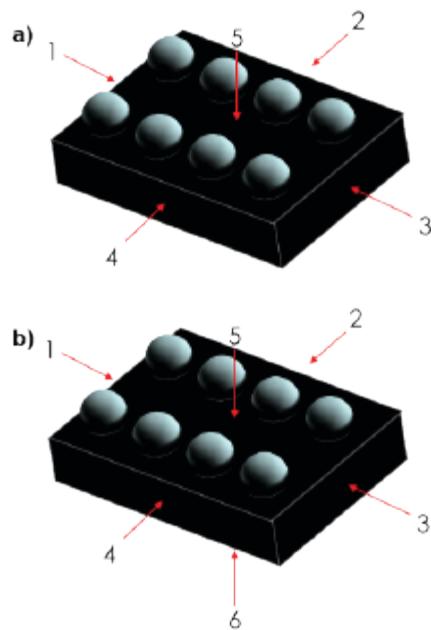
a) A drawing to show 5-sided EMC encapsulation on a die; and b) A drawing to show 6-sided EMC encapsulation on a die.
